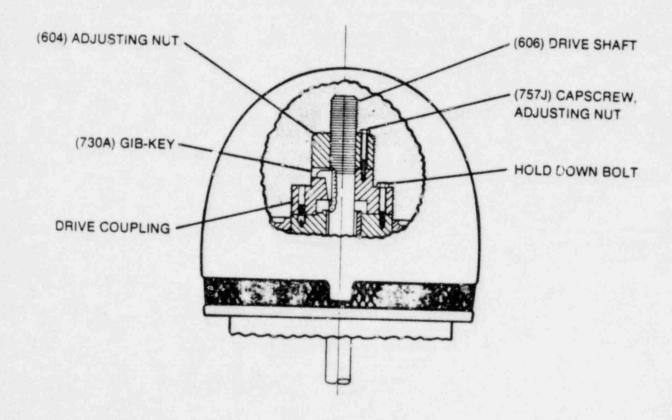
A2. HOLLOW SHAFT ADJUSTING NUT
